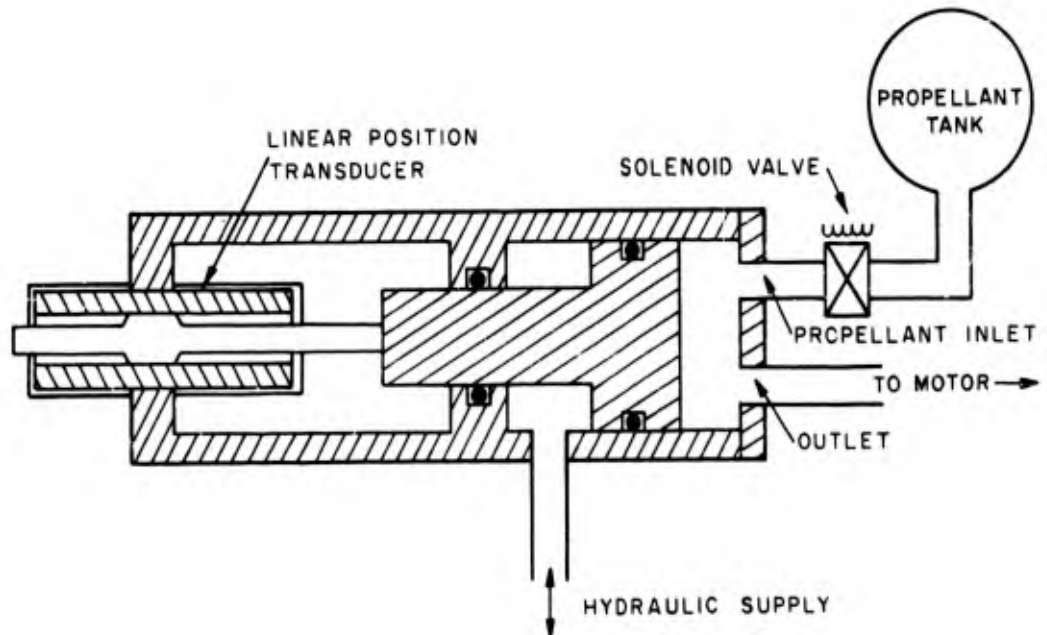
Motor Assembly Showing Piston, Inlets and Outlets, and Linear-Position Transducer.
